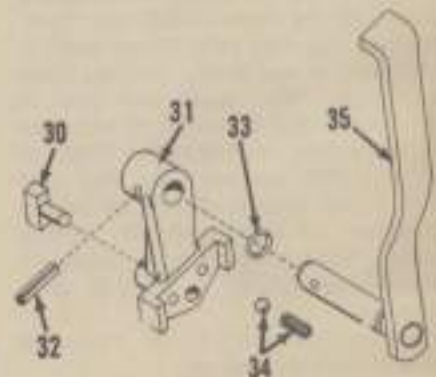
Exploded view of the pto shifter assembly. The shifter collar is shown at 18 in Fig. 144.
